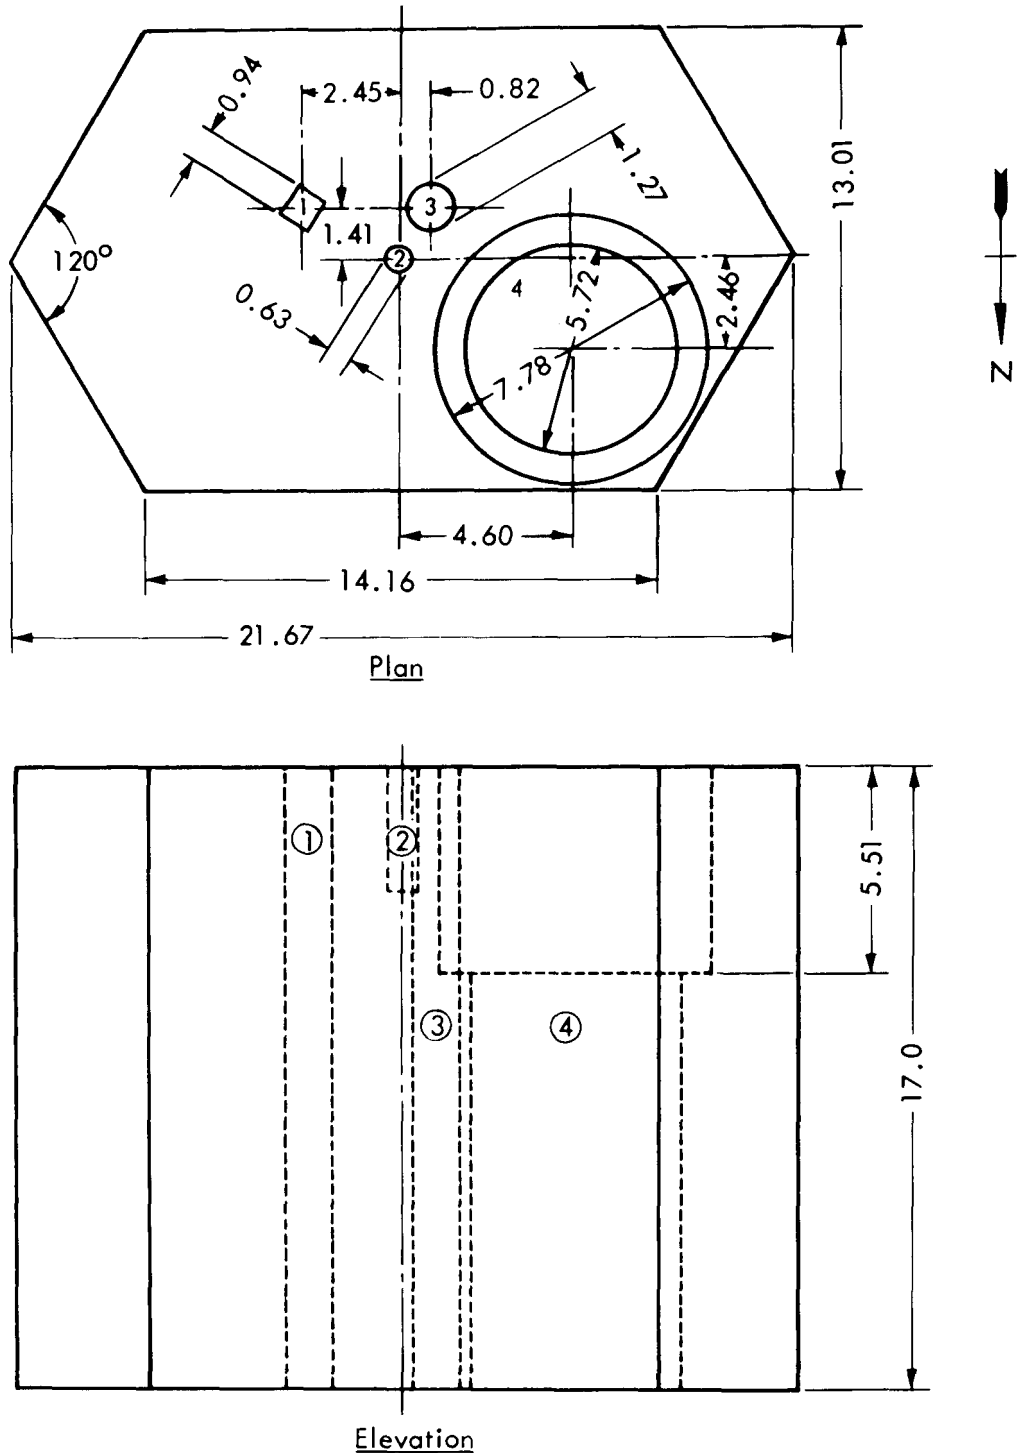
Cross Section of the Assembly at the Horizontal Midplane of the Core. (All Dimensions in Centimeters)
